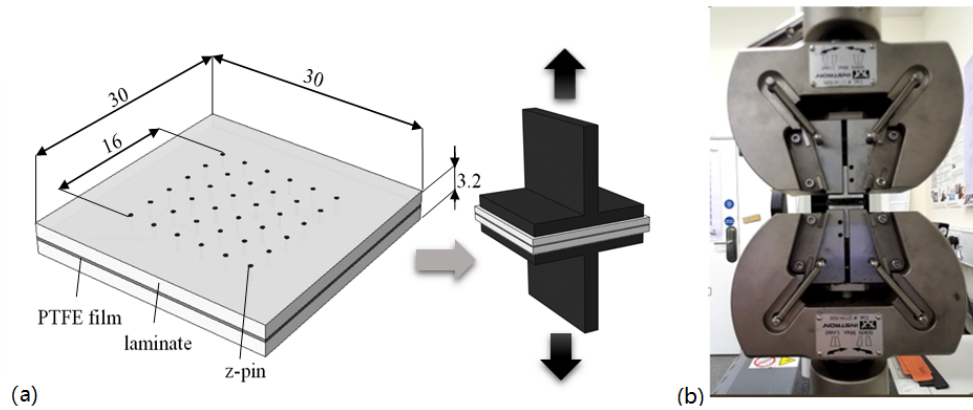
Mode I pin pull-out test (a) test specimens geometry and mounting jigs (b) test fixture in test machine
